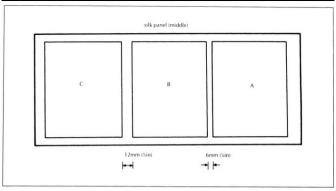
Small triple photo frame. Back (rexine) section bonded to card panels.
